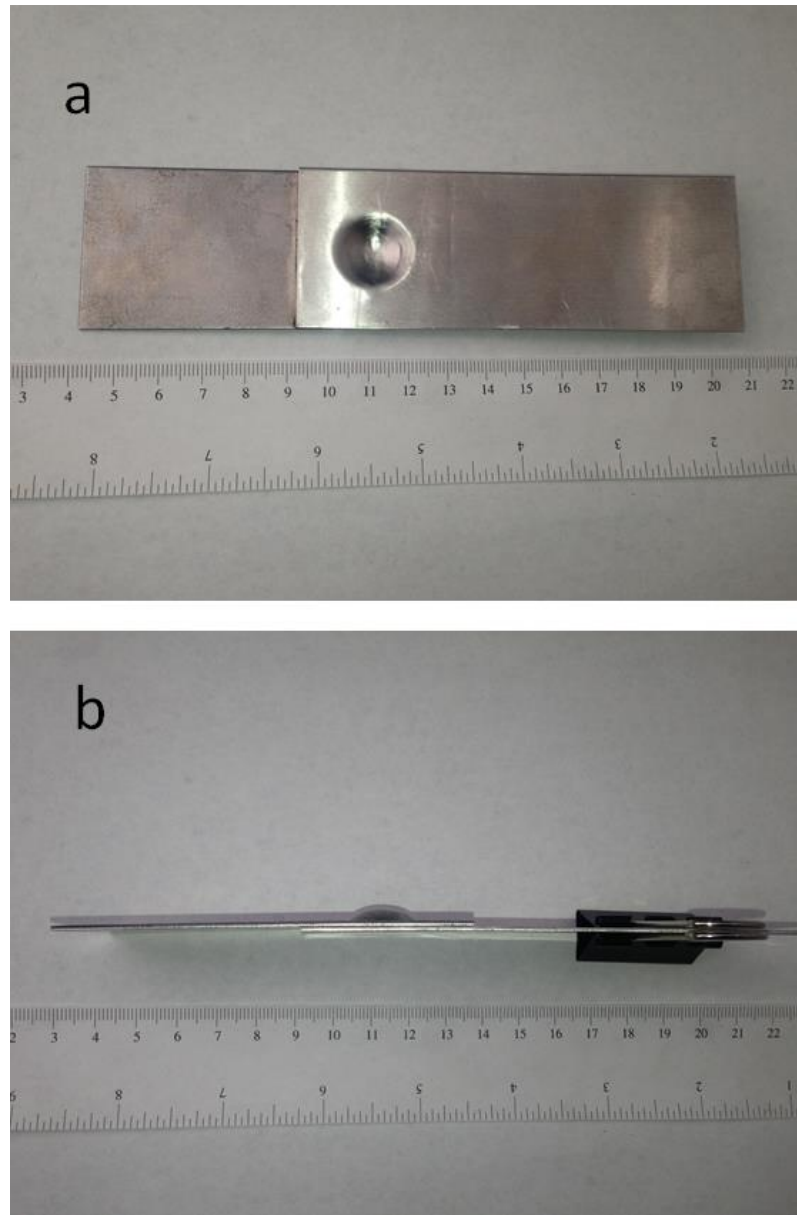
Rear view (a) and side view (b) of a weld created using parameters combination 5
